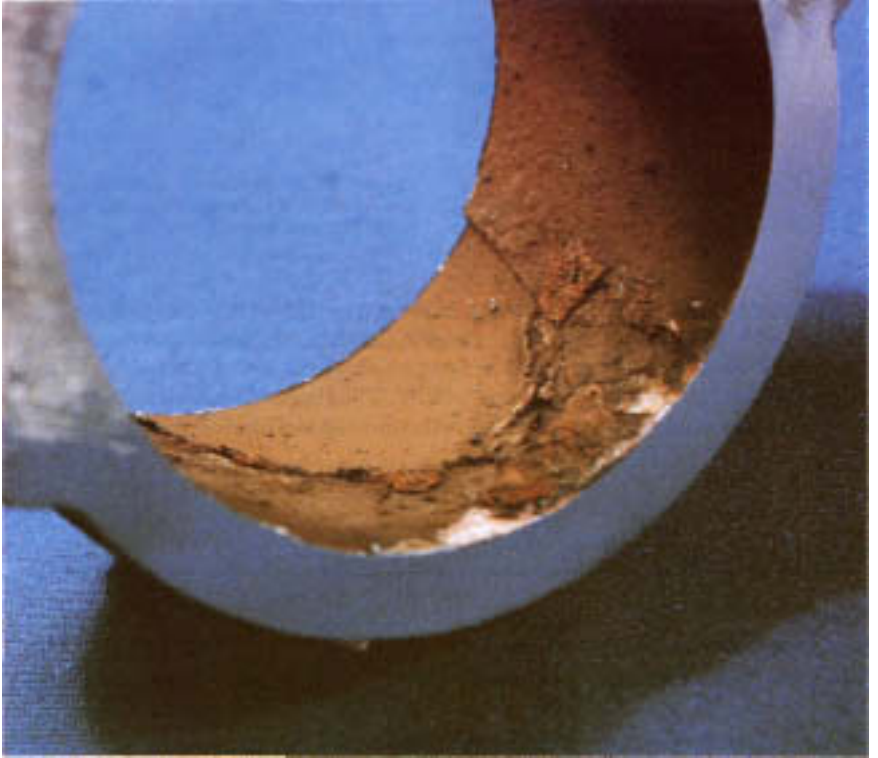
Internal surface of tube showing oval-shaped replacement window welded into place.
